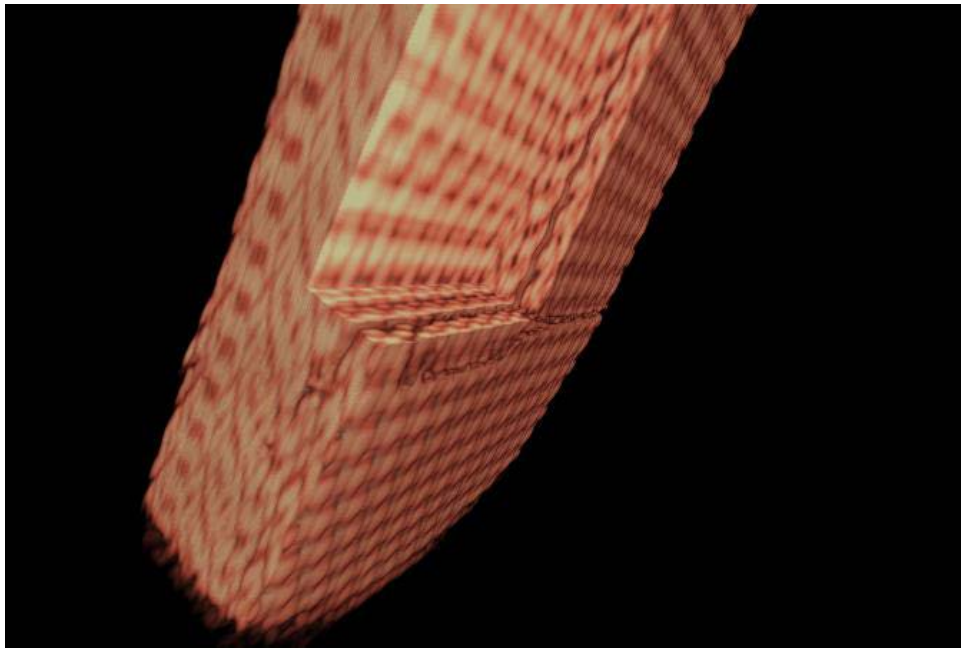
Failure damage around central area of a sample tested in air. The reconstructed volume reveals delamination and fibre breakage.
